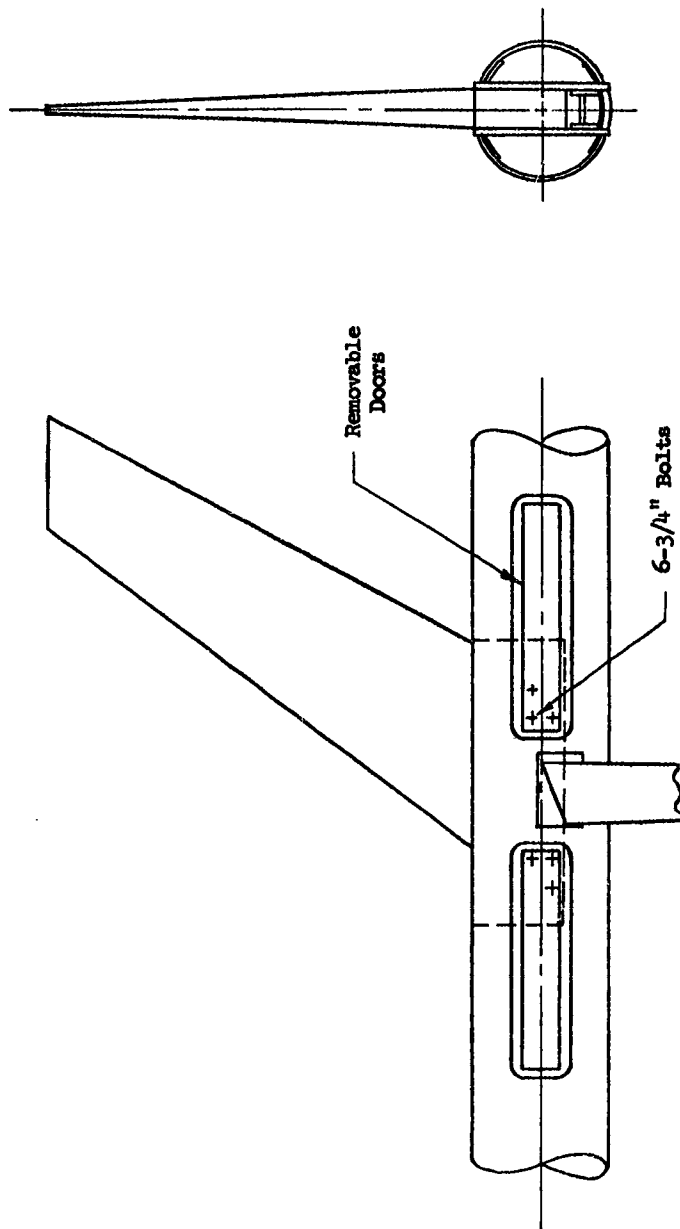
AIRLOAD SPECIMEN INSTALLED
